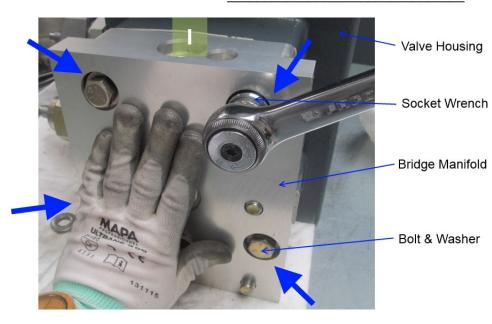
Attach Bridge Manifold to Servo and Attach O-rings to Quill Tubes
